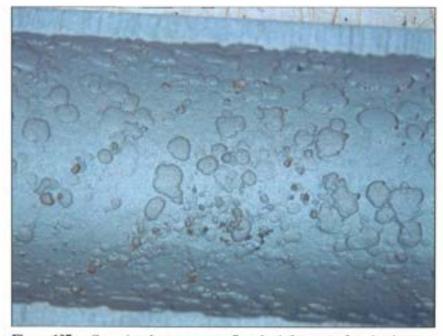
Corrosion damage on row 7 - tube 1 (bottom) after aluminum oxide blasting.
